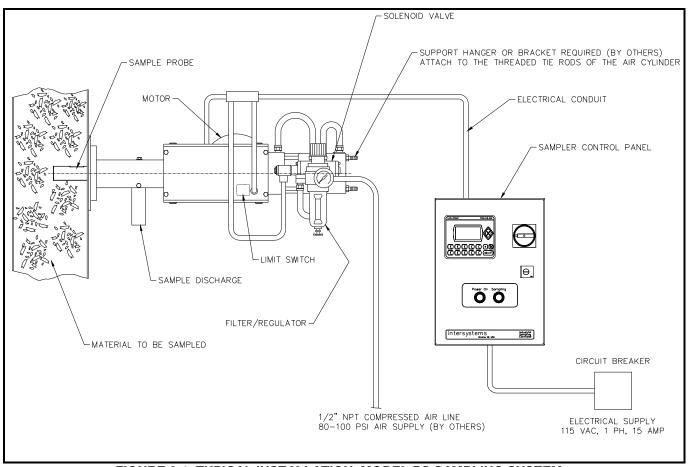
, TYPICAL INSTALLATION, MODEL PS SAMPLING SYSTEM
